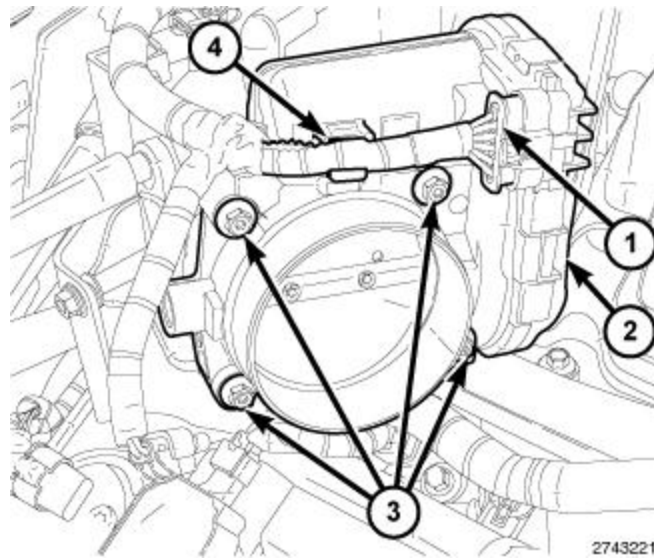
Electrical Connector, Electronic Throttle Control, Clip & Mounting Bolts
